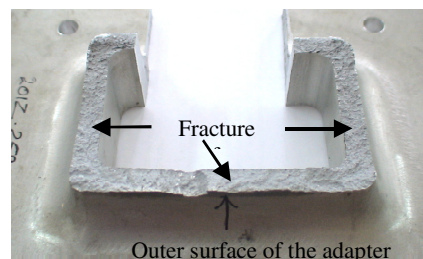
Fracture surface obtained after opening the crack in the adapter
